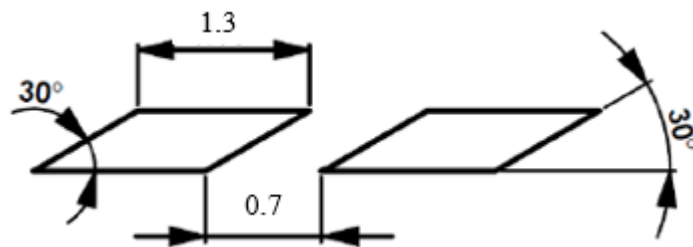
Oblique fin geometries with specific dimensional details in mm
